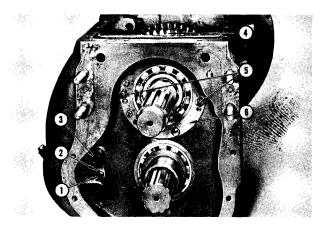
PUSHER CAPSCREWS INSTALLED
